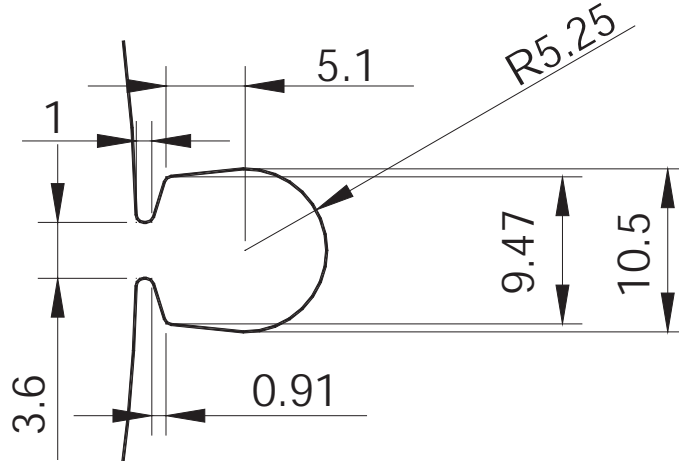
Stator slot dimensions. All dimensions are in mm.
